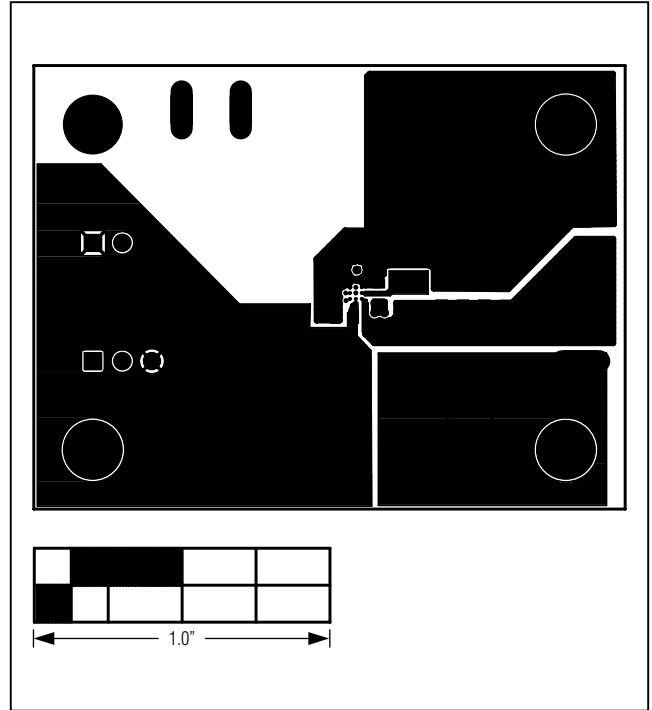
MAX8989 EV Kit PCB Layout—Component Side (Layer 1)
